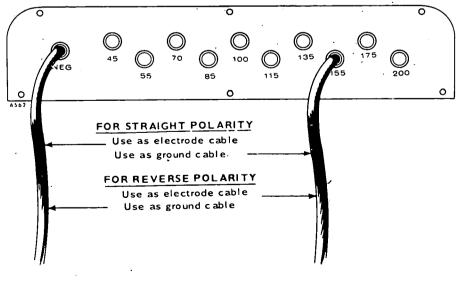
MAIN CURRENT WELDING JACK RECEPTACLES
